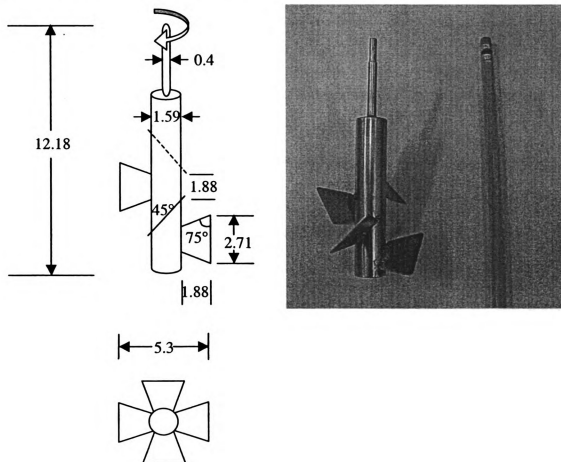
Interrupted helical screw impeller (all dimensions in cm).
